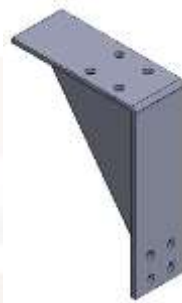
Model of carrier bridge used with (I-section beam) truck chassis
